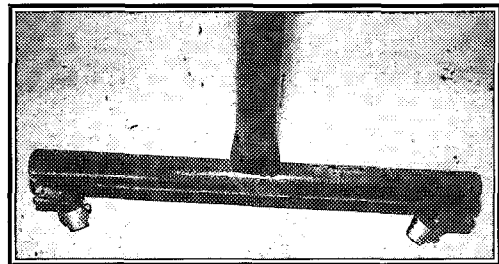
, top — Detail showing corner assembly of crane. Photo 9, center — Bottom of crane, showing casters. Photo 10, above — Detail of roller truck assembly mounted on crane.
